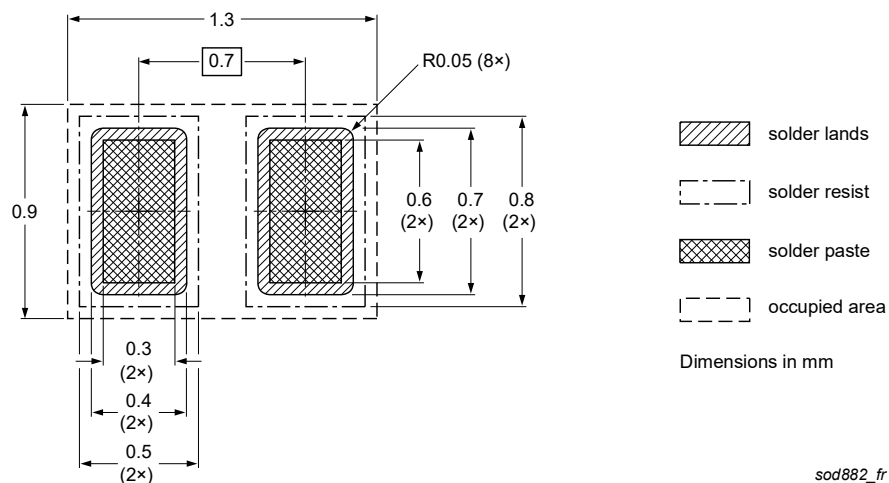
Reflow soldering footprint for DFN1006-2 (SOD882)
